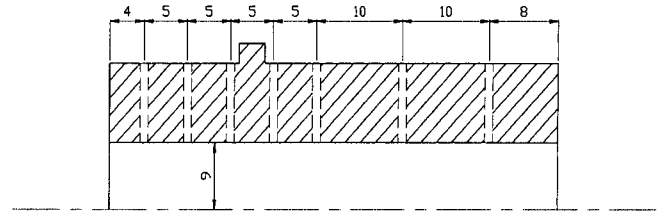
Cross sectional view of the spindle for the thermocouple setup position.
